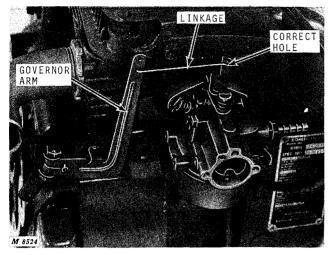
Governor-to-Carburetor Linkage (K181S Engine)
